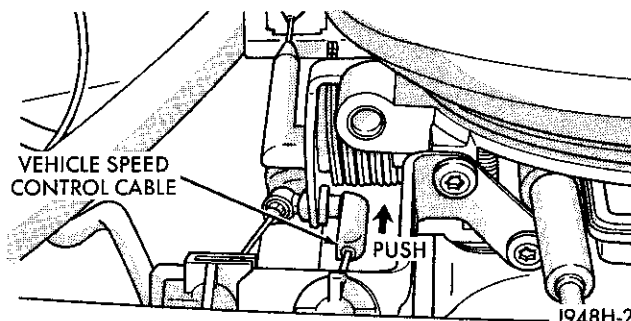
Servo Cable at Throttle Body—V-6/V-8 Engine
